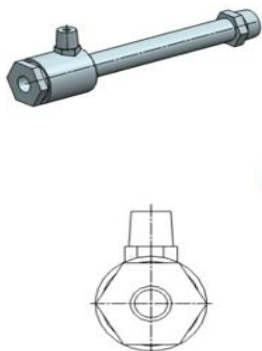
Isometric View Of The Tube With Col Air Exit And Entry Section
